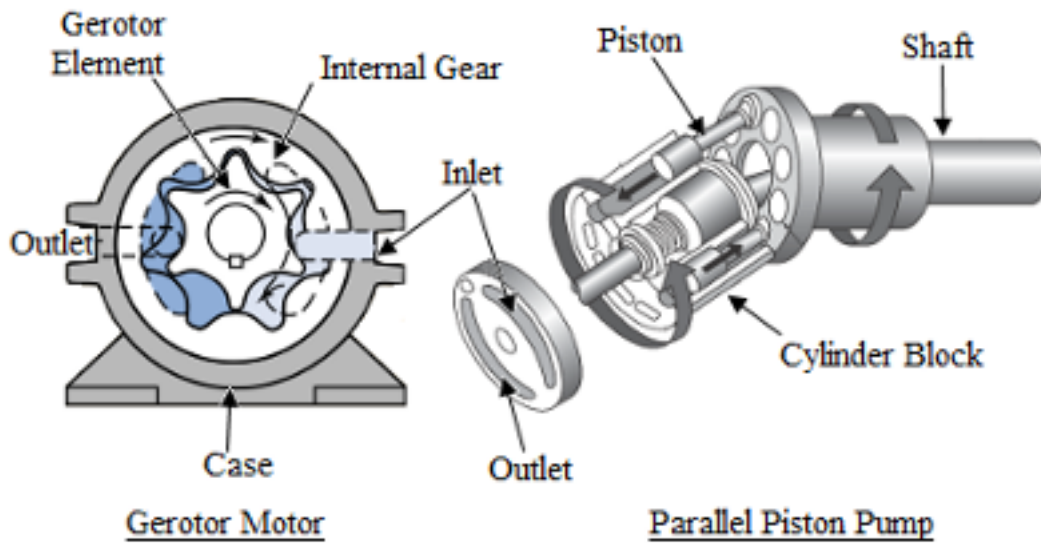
Hydraulic Parallel Piston Pump and Gerotor Hydraulic Motor
